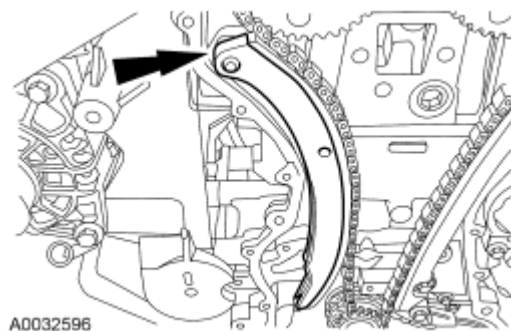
Identifying Bolts And LH Timing Chain Guide
